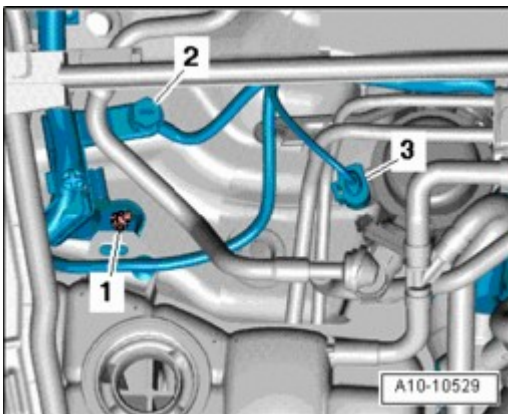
Removing Bolts & Disconnecting Electrical Connector On Brake System Vacuum Pump V192
